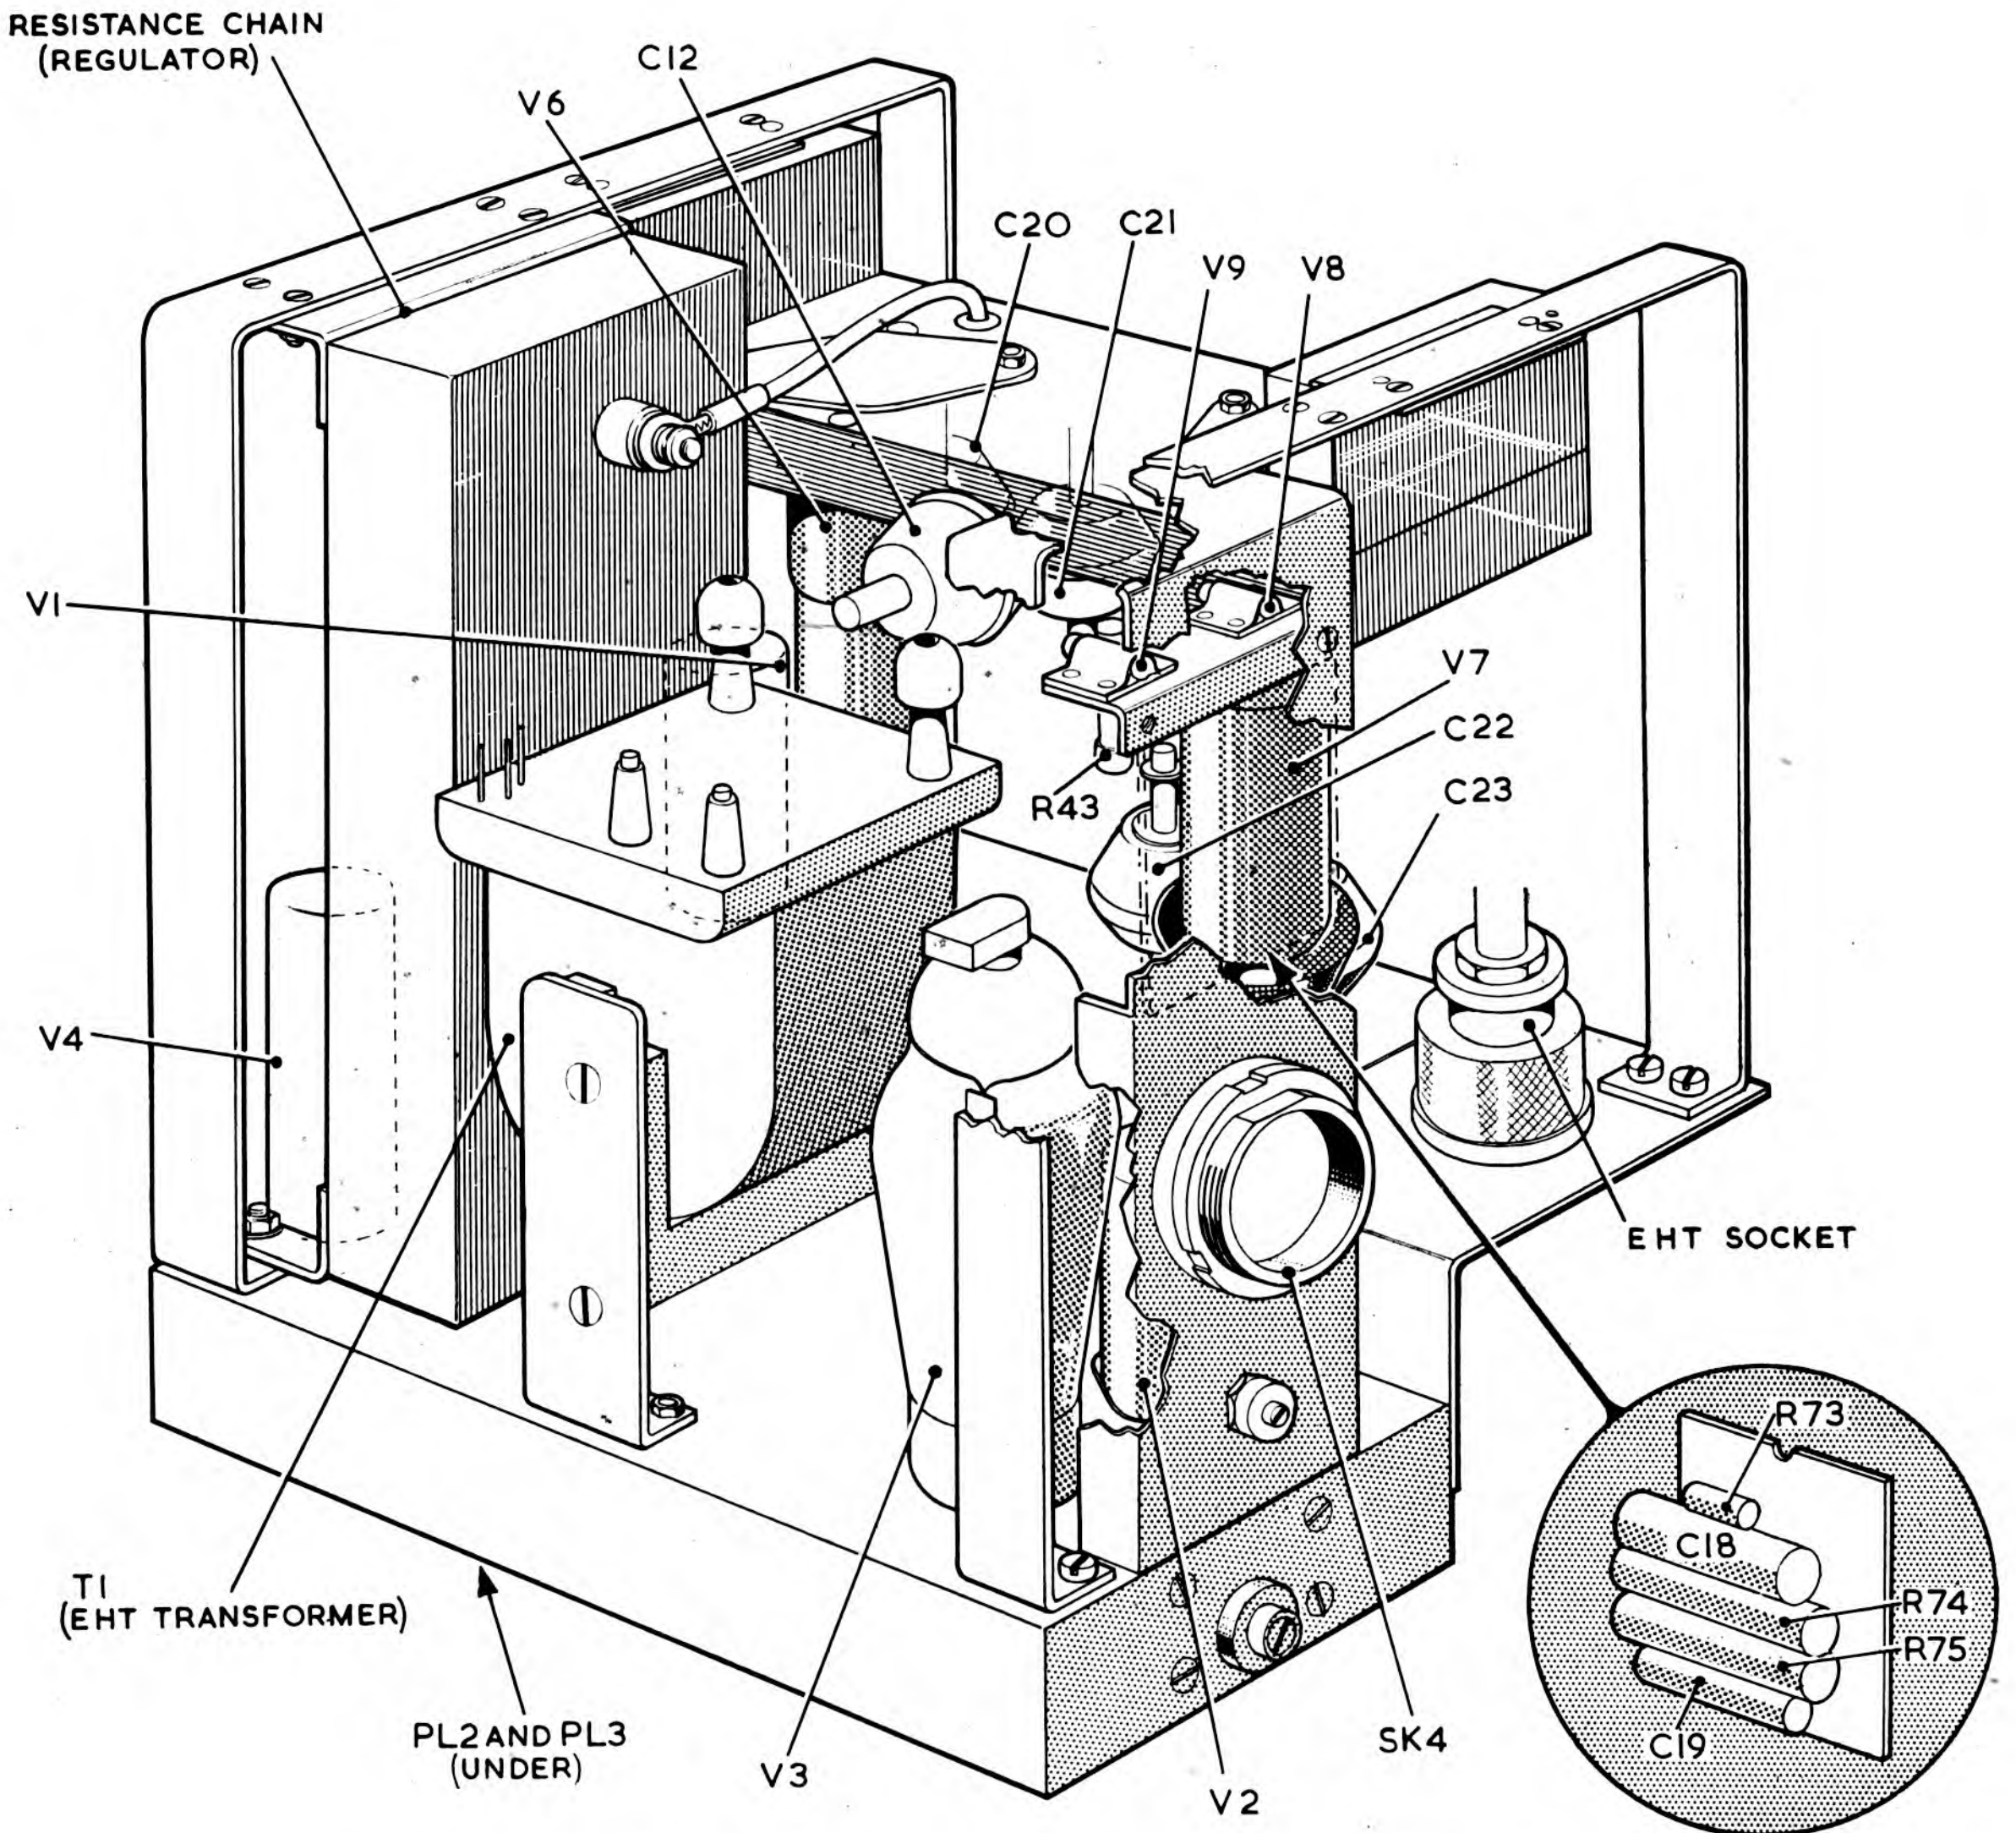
Power unit (EHT) Type 898 (case removed)—general view
